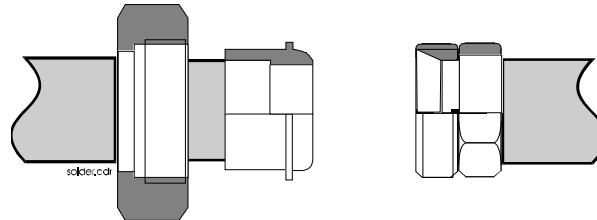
Nut, solder sleeve and soldering nipple
